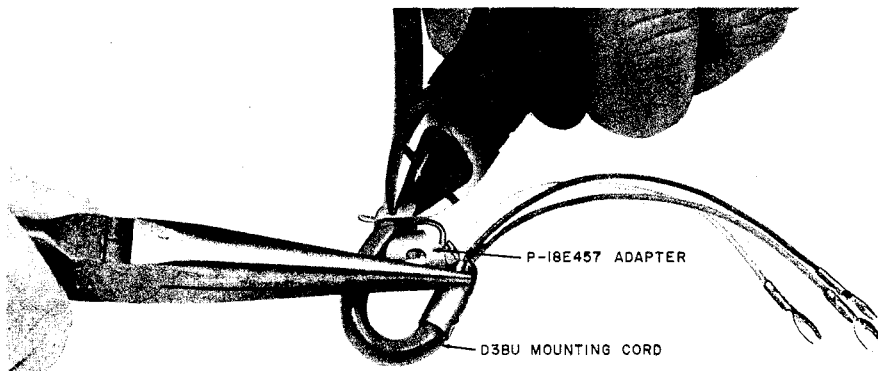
Removing Adapter from D3BU or D4BP Mounting Cord
